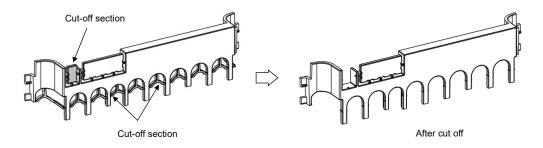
Wiring Guide (FRN0069E3S-2G)
